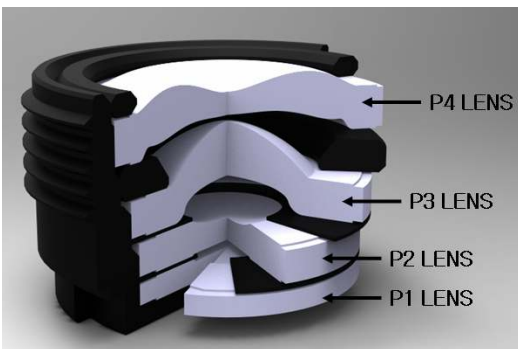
Cell-phone 5Mega pixel camera lens assembly Section view
